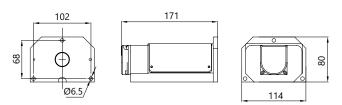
Outline drawing and dimensions of 3 mm fiber bundle
